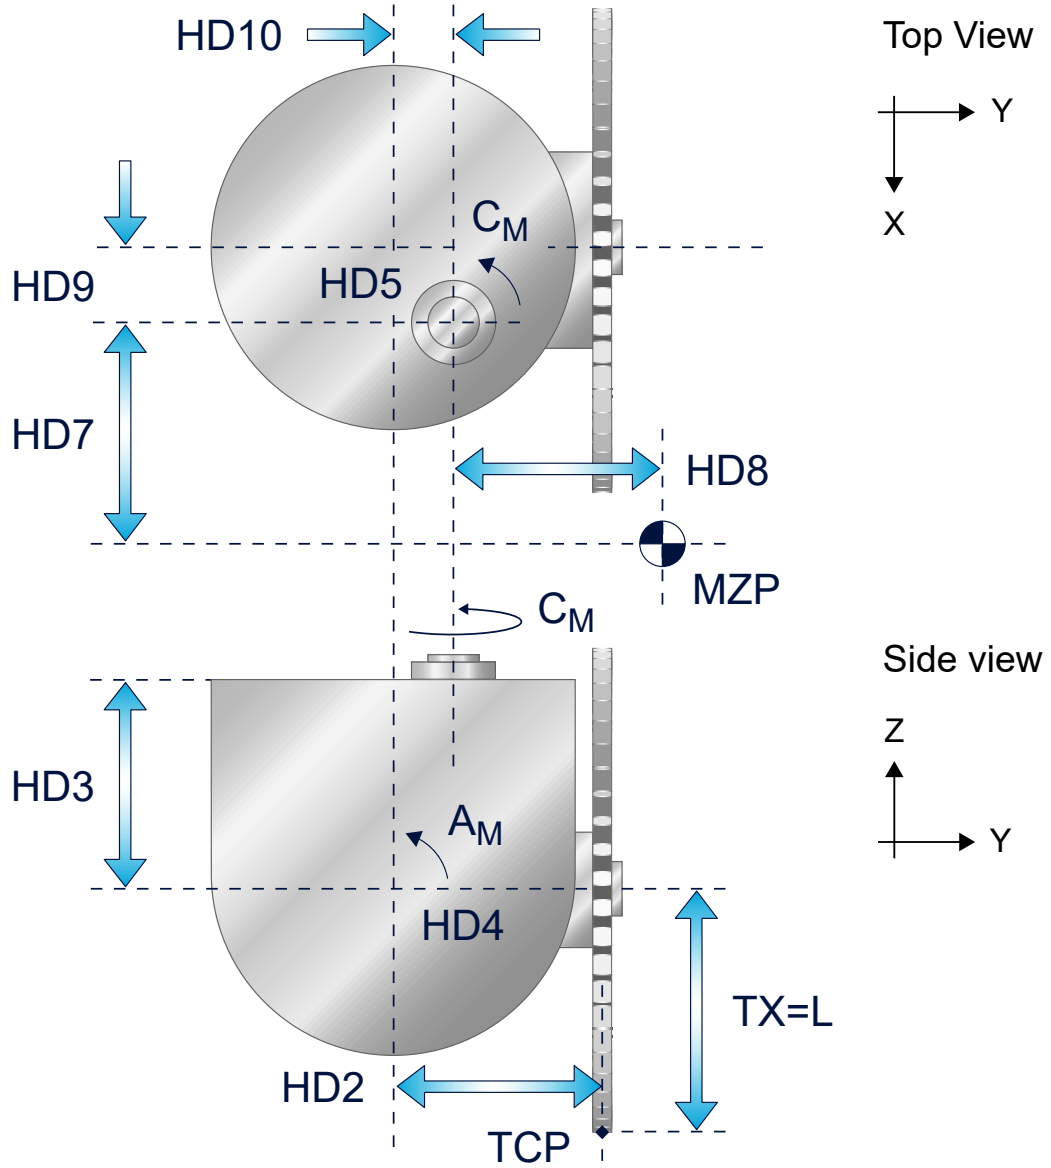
5-axis sawing tool (zero position where HD5 =0, CM=0, HD4 =0, AM =90)
